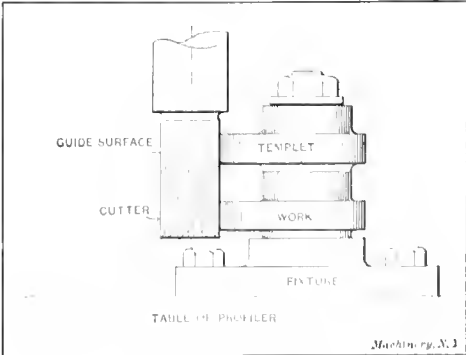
The Simplest and Stiffest Arrangement for Cam Cutting
